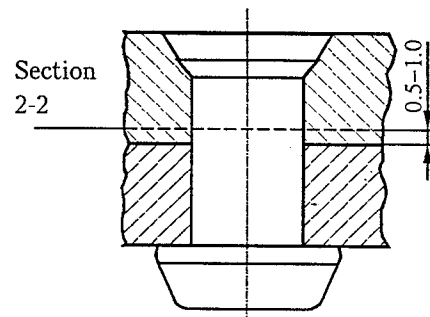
The schematic of measuring the clearance in a joint with soft-collar rivet
